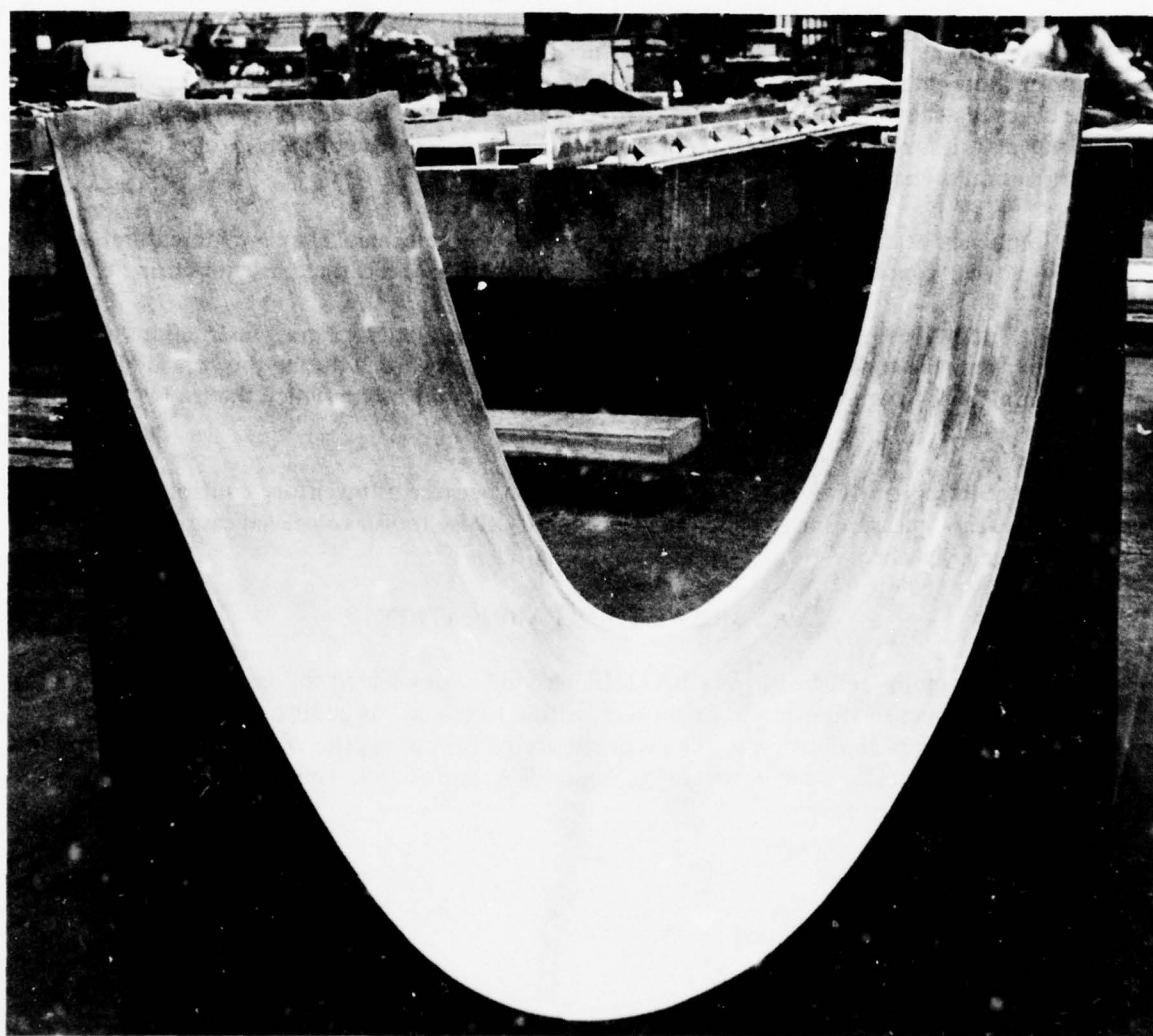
Metal Bonding Tool Used for Rebuilding Wing Leading-Edge Section
